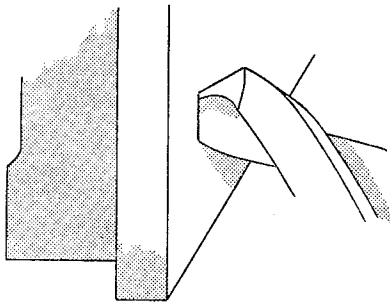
Demonstrating grinding movement with drill held against the surface plate
